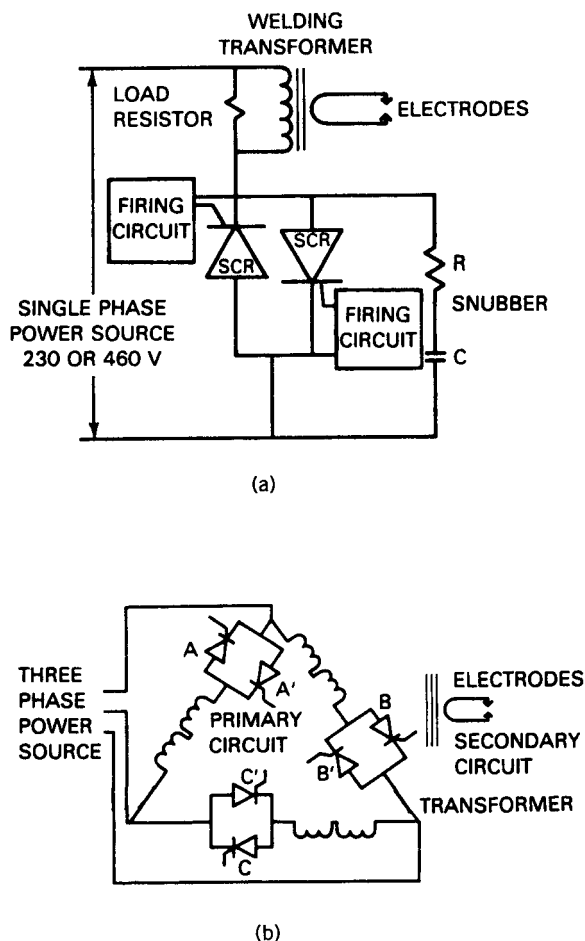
Typical single-phase AC spot welding circuit. (From *Welding Handbook*, Vol. 2: *Welding Processes*, 8th ed., edited by R. L. O'Brien, published in 1991 by and used with permission of the American Welding Society, Miami, FL.)
